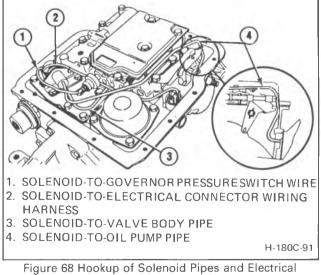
Hookup of Solenoid Pipes and Electrical Wires
